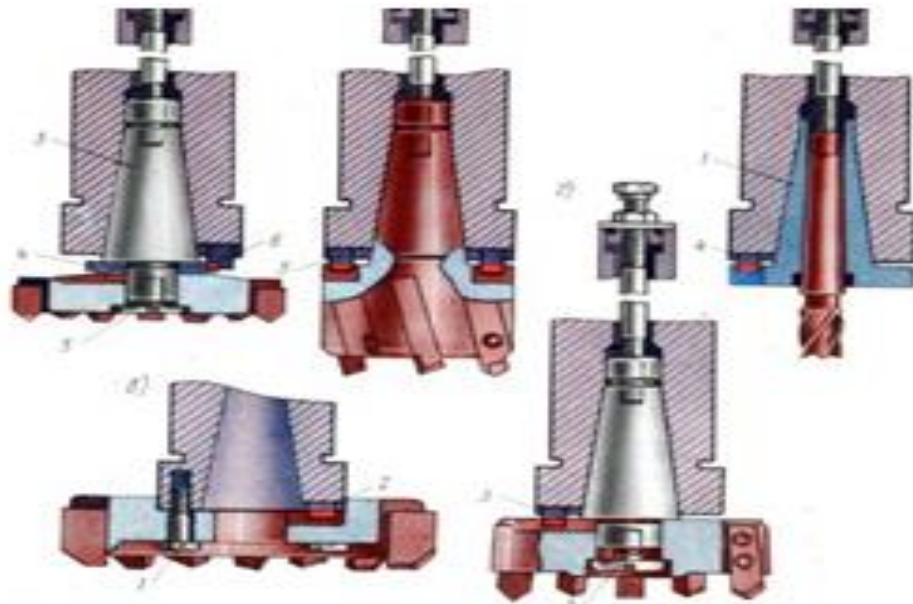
Installation and fixing of end mills on vertical milling machines
